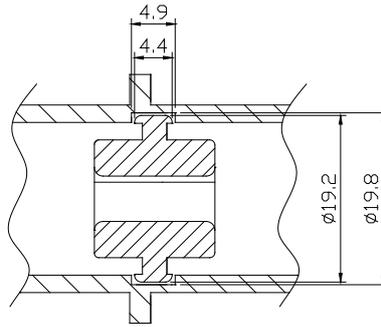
Design dimensions of the "T-slot guide core" inside the adapter
